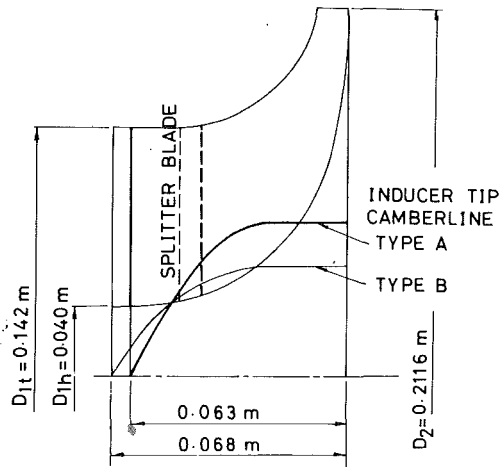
Meridional geometry and blade camberline shape of test impellers
